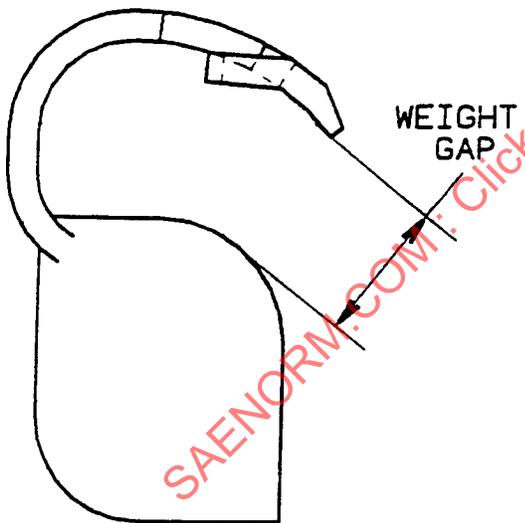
STEEL WHEEL RIM FLANGE TERMINOLOGY
